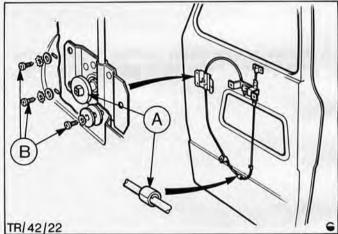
Remove crank mechanism. A - Cushioning rubber B - Crank mechanism plate fastening screws
